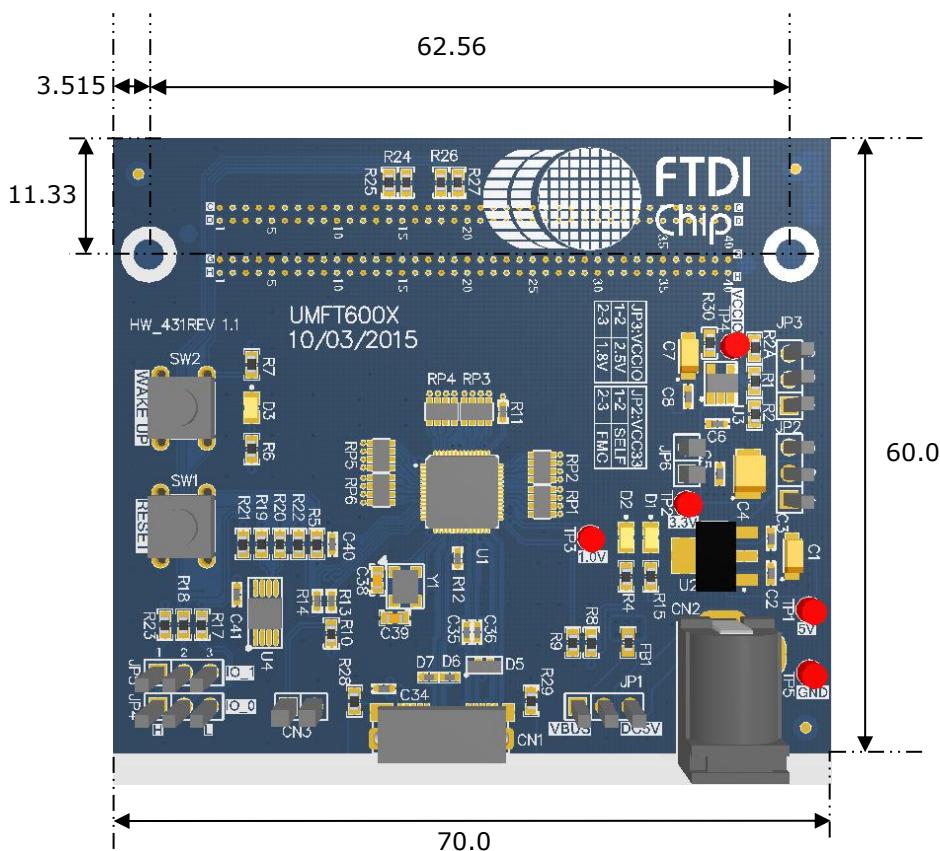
UMFT600X/UMFT601X Dimensions (Top view)
